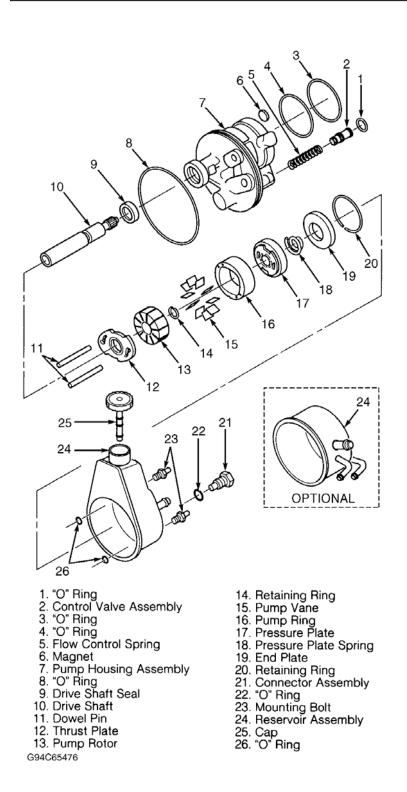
Exploded View Of Power Steering Pump (Model "P") Courtesy of GENERAL MOTORS CORP.
